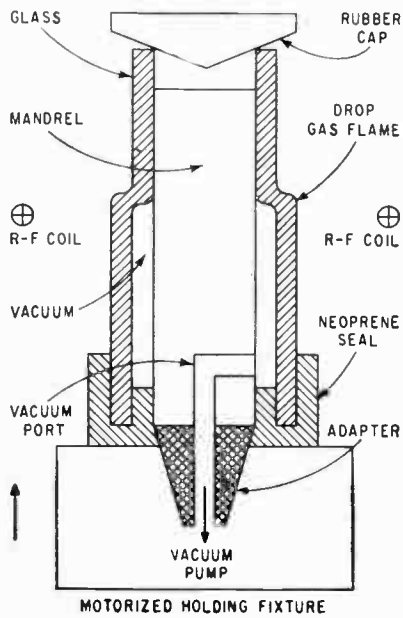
Method of mounting mandrel and maintaining vacuum between mandrel and tube
